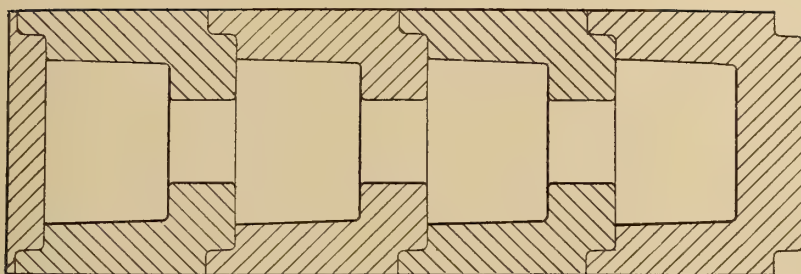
SECTION OF A CONTINUOUS FORM OF MOULD
